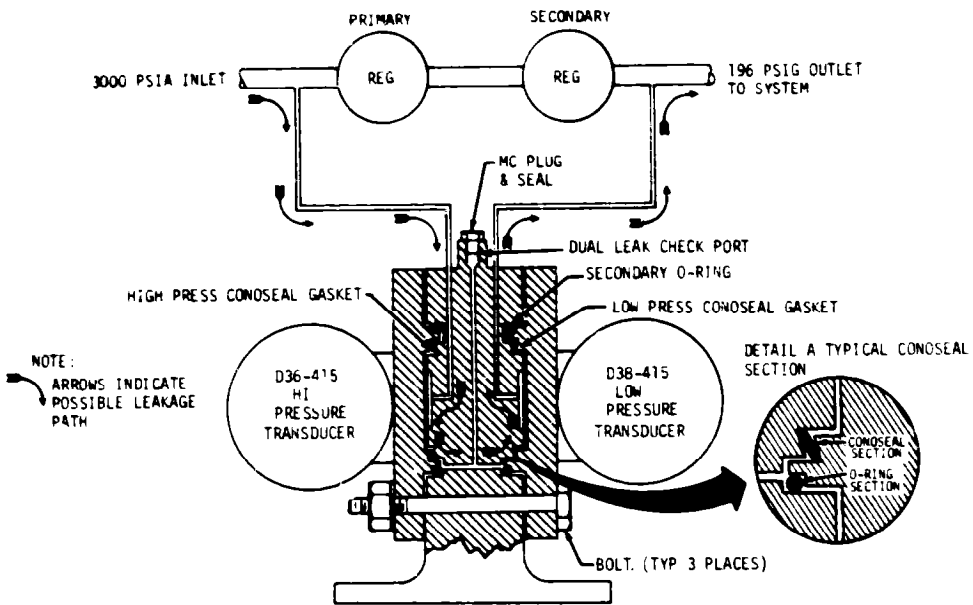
APS Helium Bottle/Regulator Discharge Transducer Mounting
